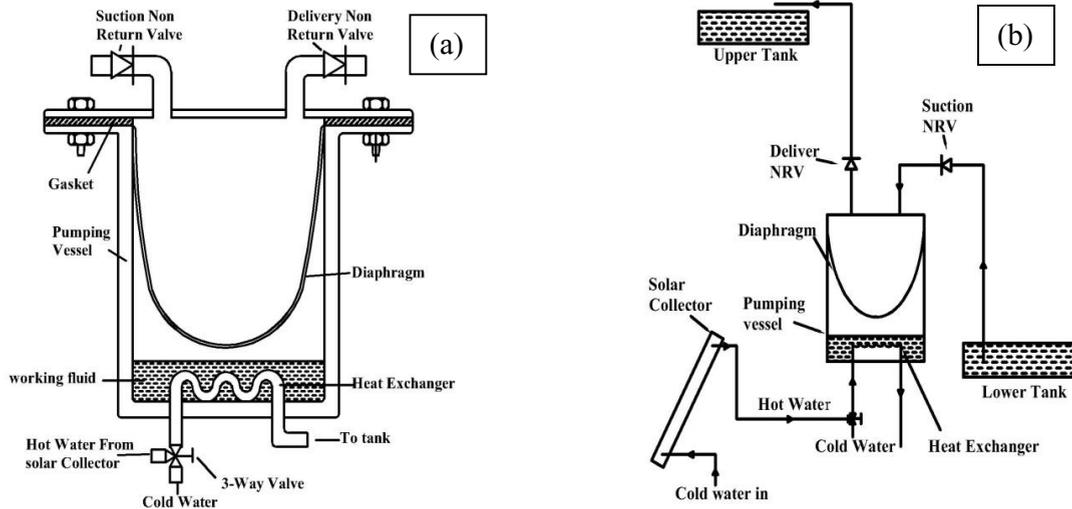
(a) General Assembly drawing of pumping vessel, (b) System Assembly Drawing.
